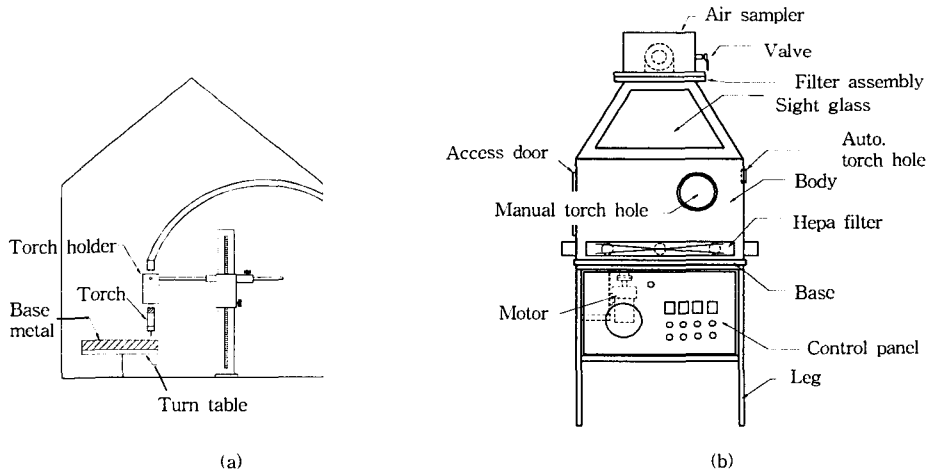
Schematic Drawing of the Fume Collection Chamber Remodeled for Manual, Semiautomatic and Automatic Welding Processes which has the Capability of the Exact Control of Welding Conditions :
